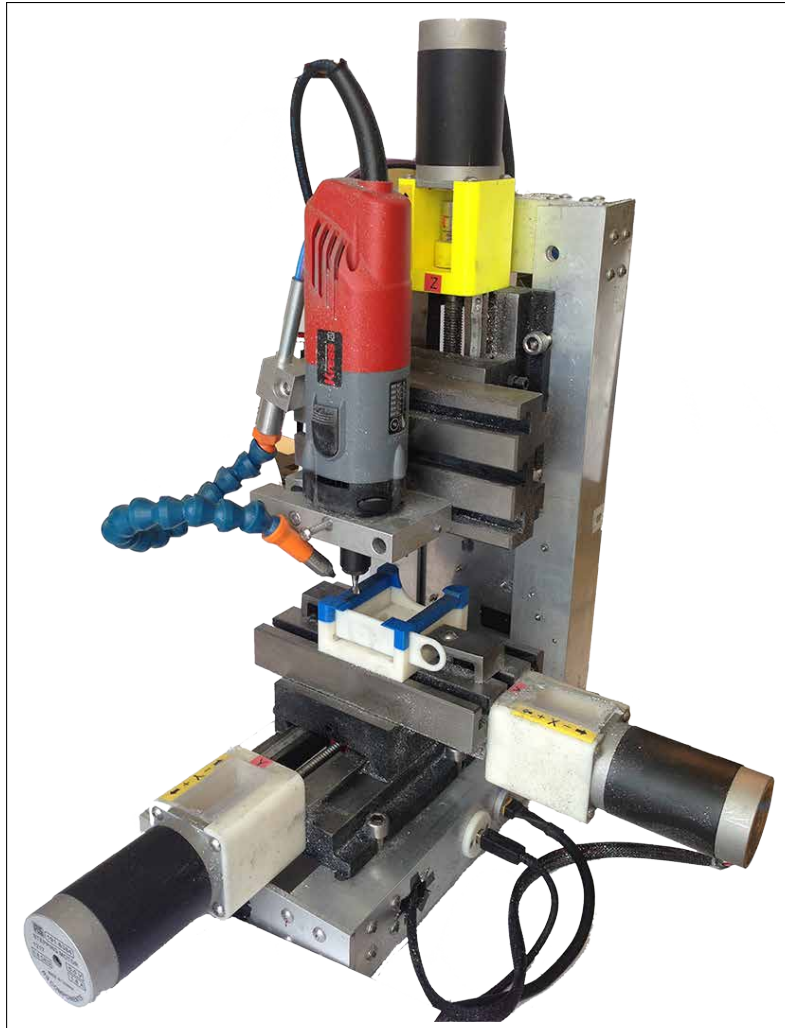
Picture of Torjus milling machine with the aluminium work holder and a 6 mm end mill in the origin of the work coordinate system.
